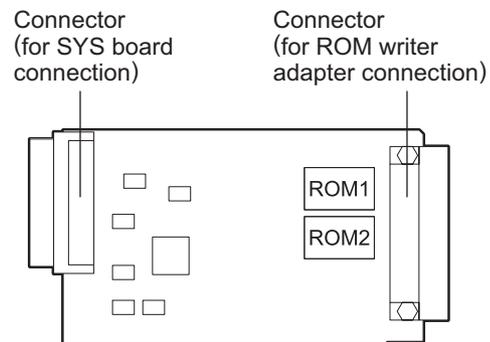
Jig board: PWA-DWNLD-350-JIG1(16 MB)
